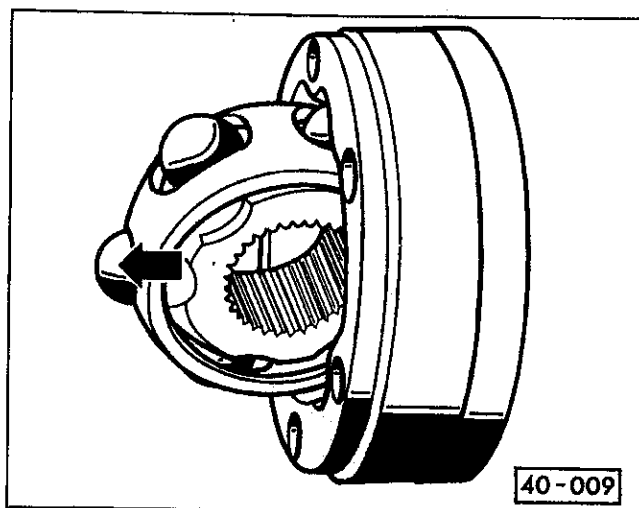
Ball hub and cage being removed from housing. Pull in direction of arrow.
